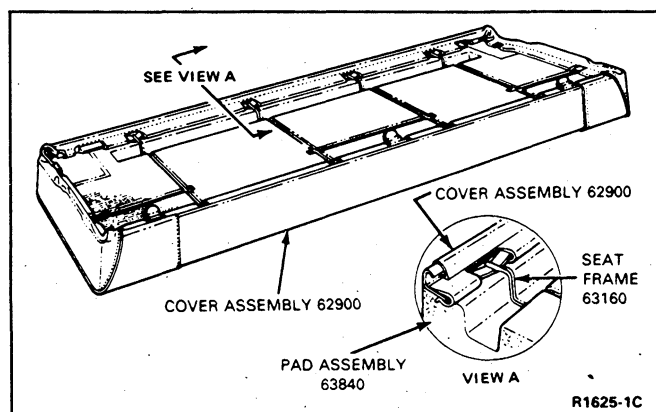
Front Seat Cushion Cover Installation—F-150—F-350 Super Cab
